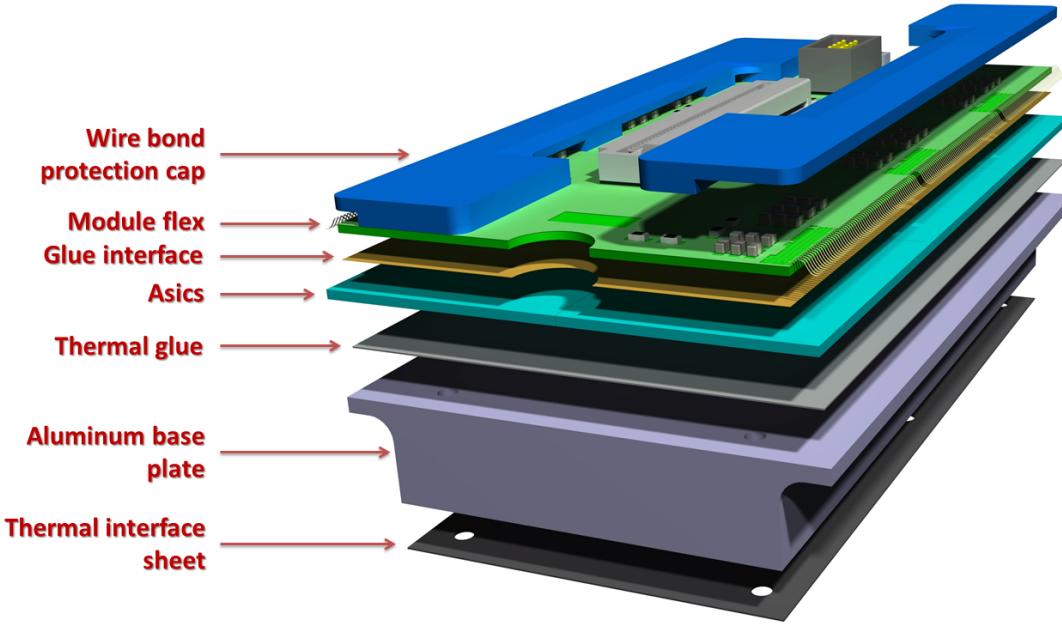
Exploded CAD view of a module assembly. A module is composed by six ASICs glued to an aluminum base-plate. The module flex with the electrical interconnection and the SMD components is glued on the top of the ASICs. The bottom layer is the thermal interface sheet that will be added when integrating a module to the cooling plate. The size is $\sim 31 \times 67 \text{ mm}^2$.
